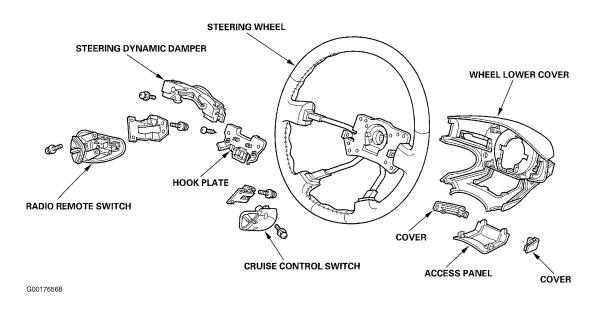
Exploded View Of Steering Wheel Disassembly/Reassembly (MDX) Courtesy of AMERICAN HONDA MOTOR CO., INC.
